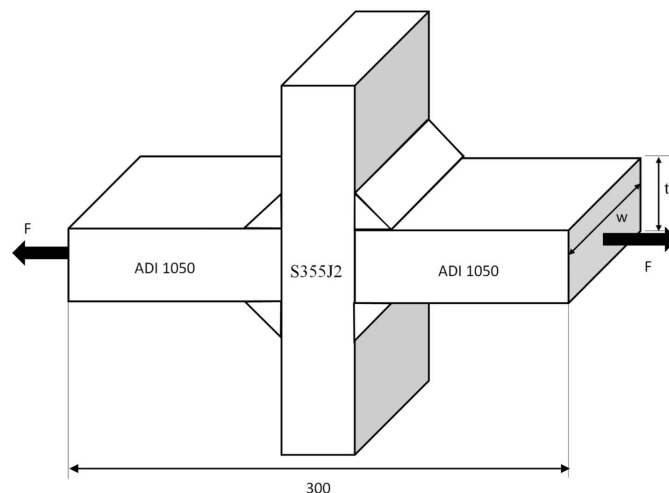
Geometry of the cruciform load-carrying fillet welded joints under axial load [66].
